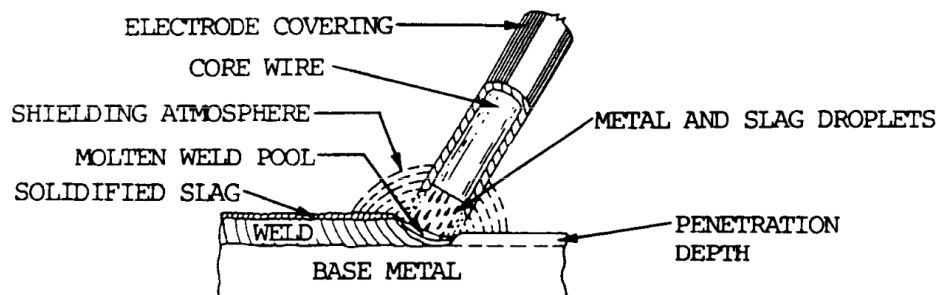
Shielded Metal Arc Welding [7]
